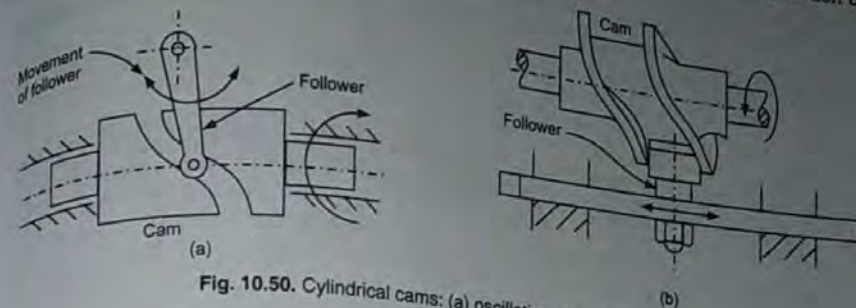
Cylindrical cams: (a) oscillating, (b) reciprocating
